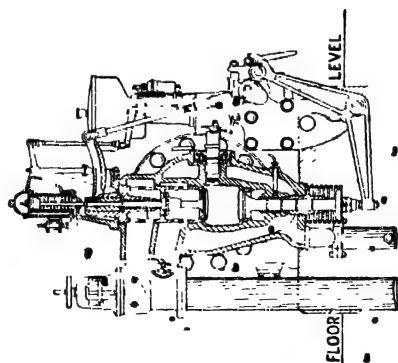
Sectional Arrangement—Horizontal Gas Engine (Crossley Bros., Ltd.)
